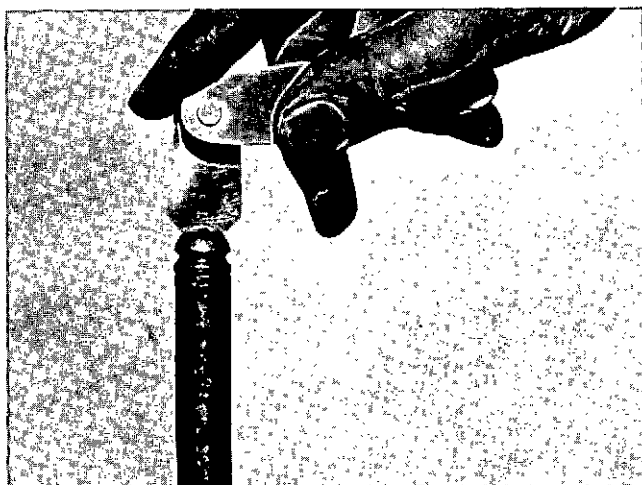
, N20309. Checking push tube ball end with radius gauge
